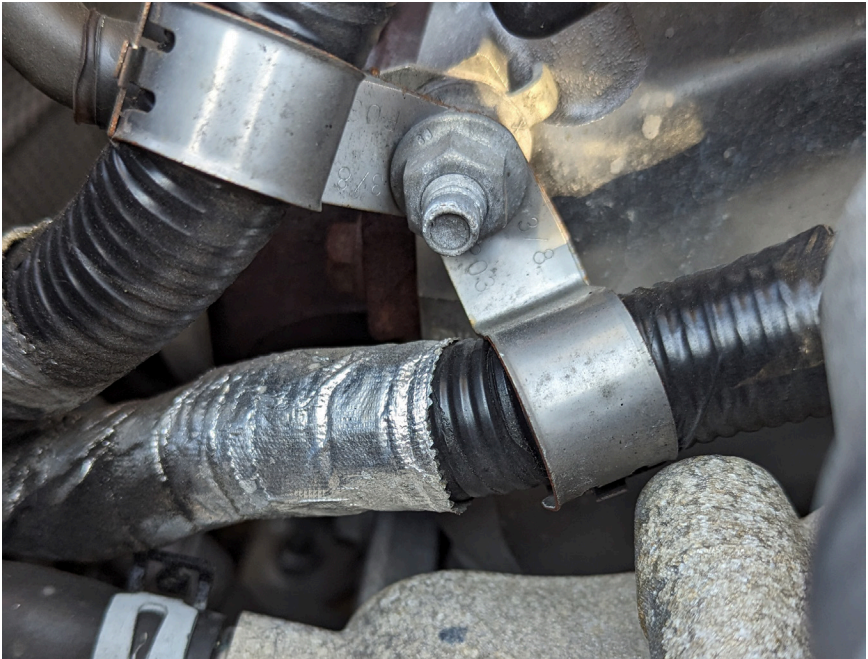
Stud and Clamps to Remove from Right Side Cylinder Head
